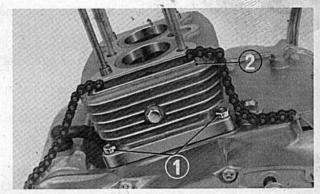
(1) Cylinder attaching nut (2) Cylinder
